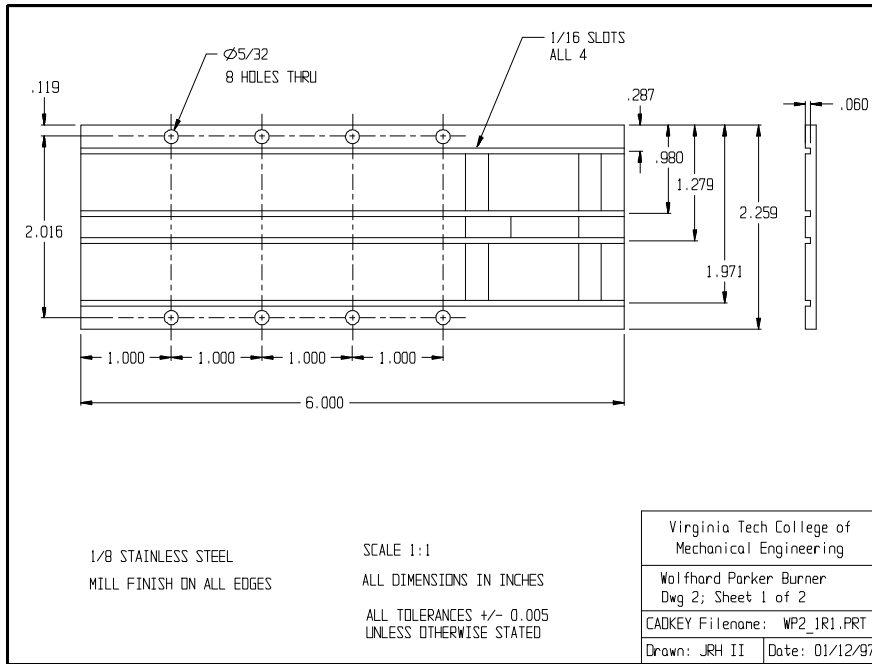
Burner North and South Walls, Drawing 2 Sheet 1 of 2
